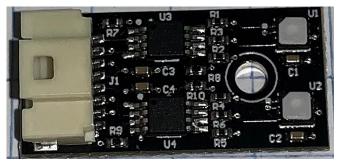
Fabricated and populated SHT35 sensor PCB.
